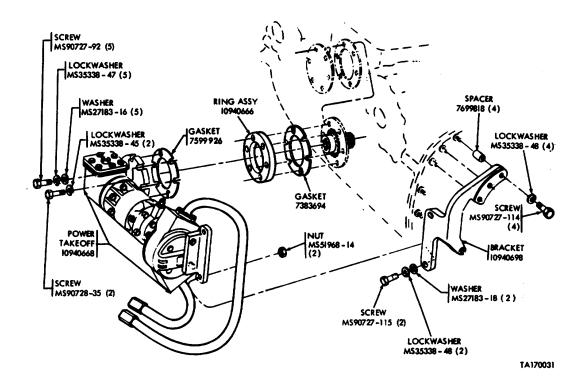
installation of power takeoff, sprocket assembly, hoses, and bracket (sheet 2 of 2).
